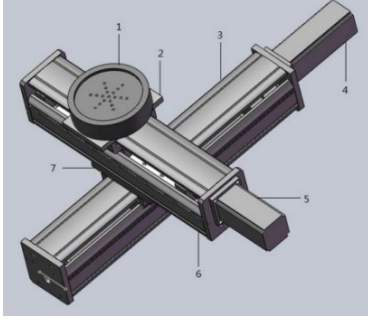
The dual-axes motion platform. It consists of: 1. Wafer stage 2. Bracket 3. Y-axis ball screw pair 4. Y-axis servo motor 5. X-axis servo motor 6. X-axis ball screw pair 7. Bracket
